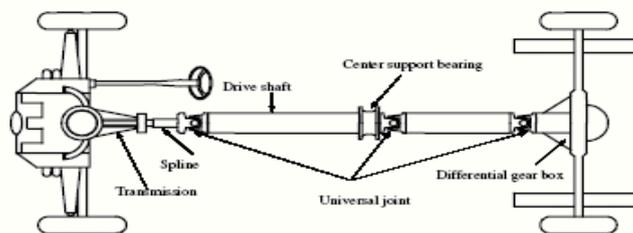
Conventional two-piece drive shaft arrangement for rear wheel vehicle driving system.
